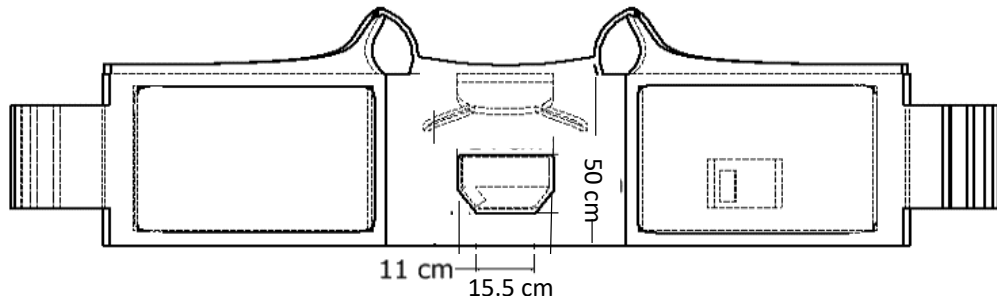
Detailed drawing of selected concept (baby holding and covering unit)
